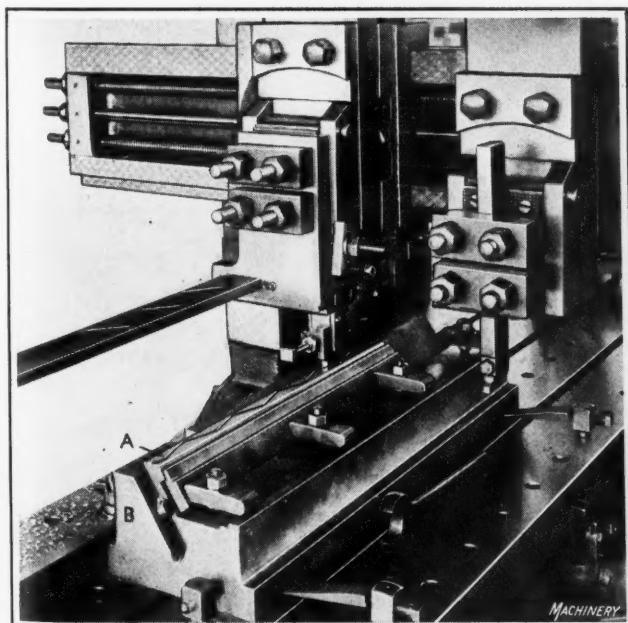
Cam-actuated Attachment which adapts a Planer of Standard Design for cutting Zigzag Oil-grooves in Slide Bearings
